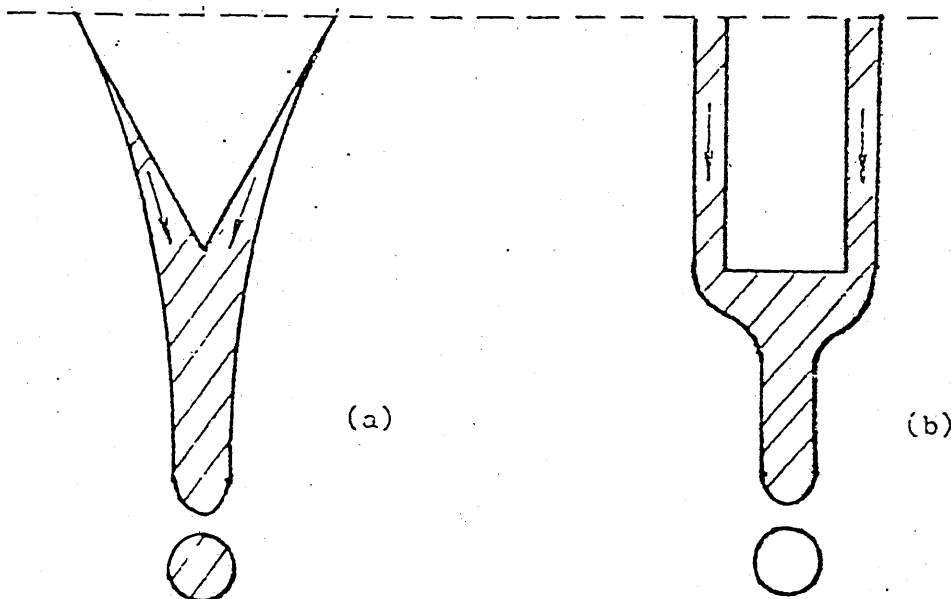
Model of spray transfer mechanism (Ref. 44)
